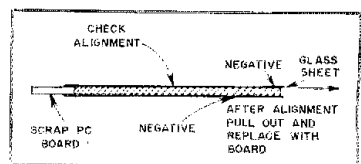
A method of checking negative alignment for double-sided circuit boards.
